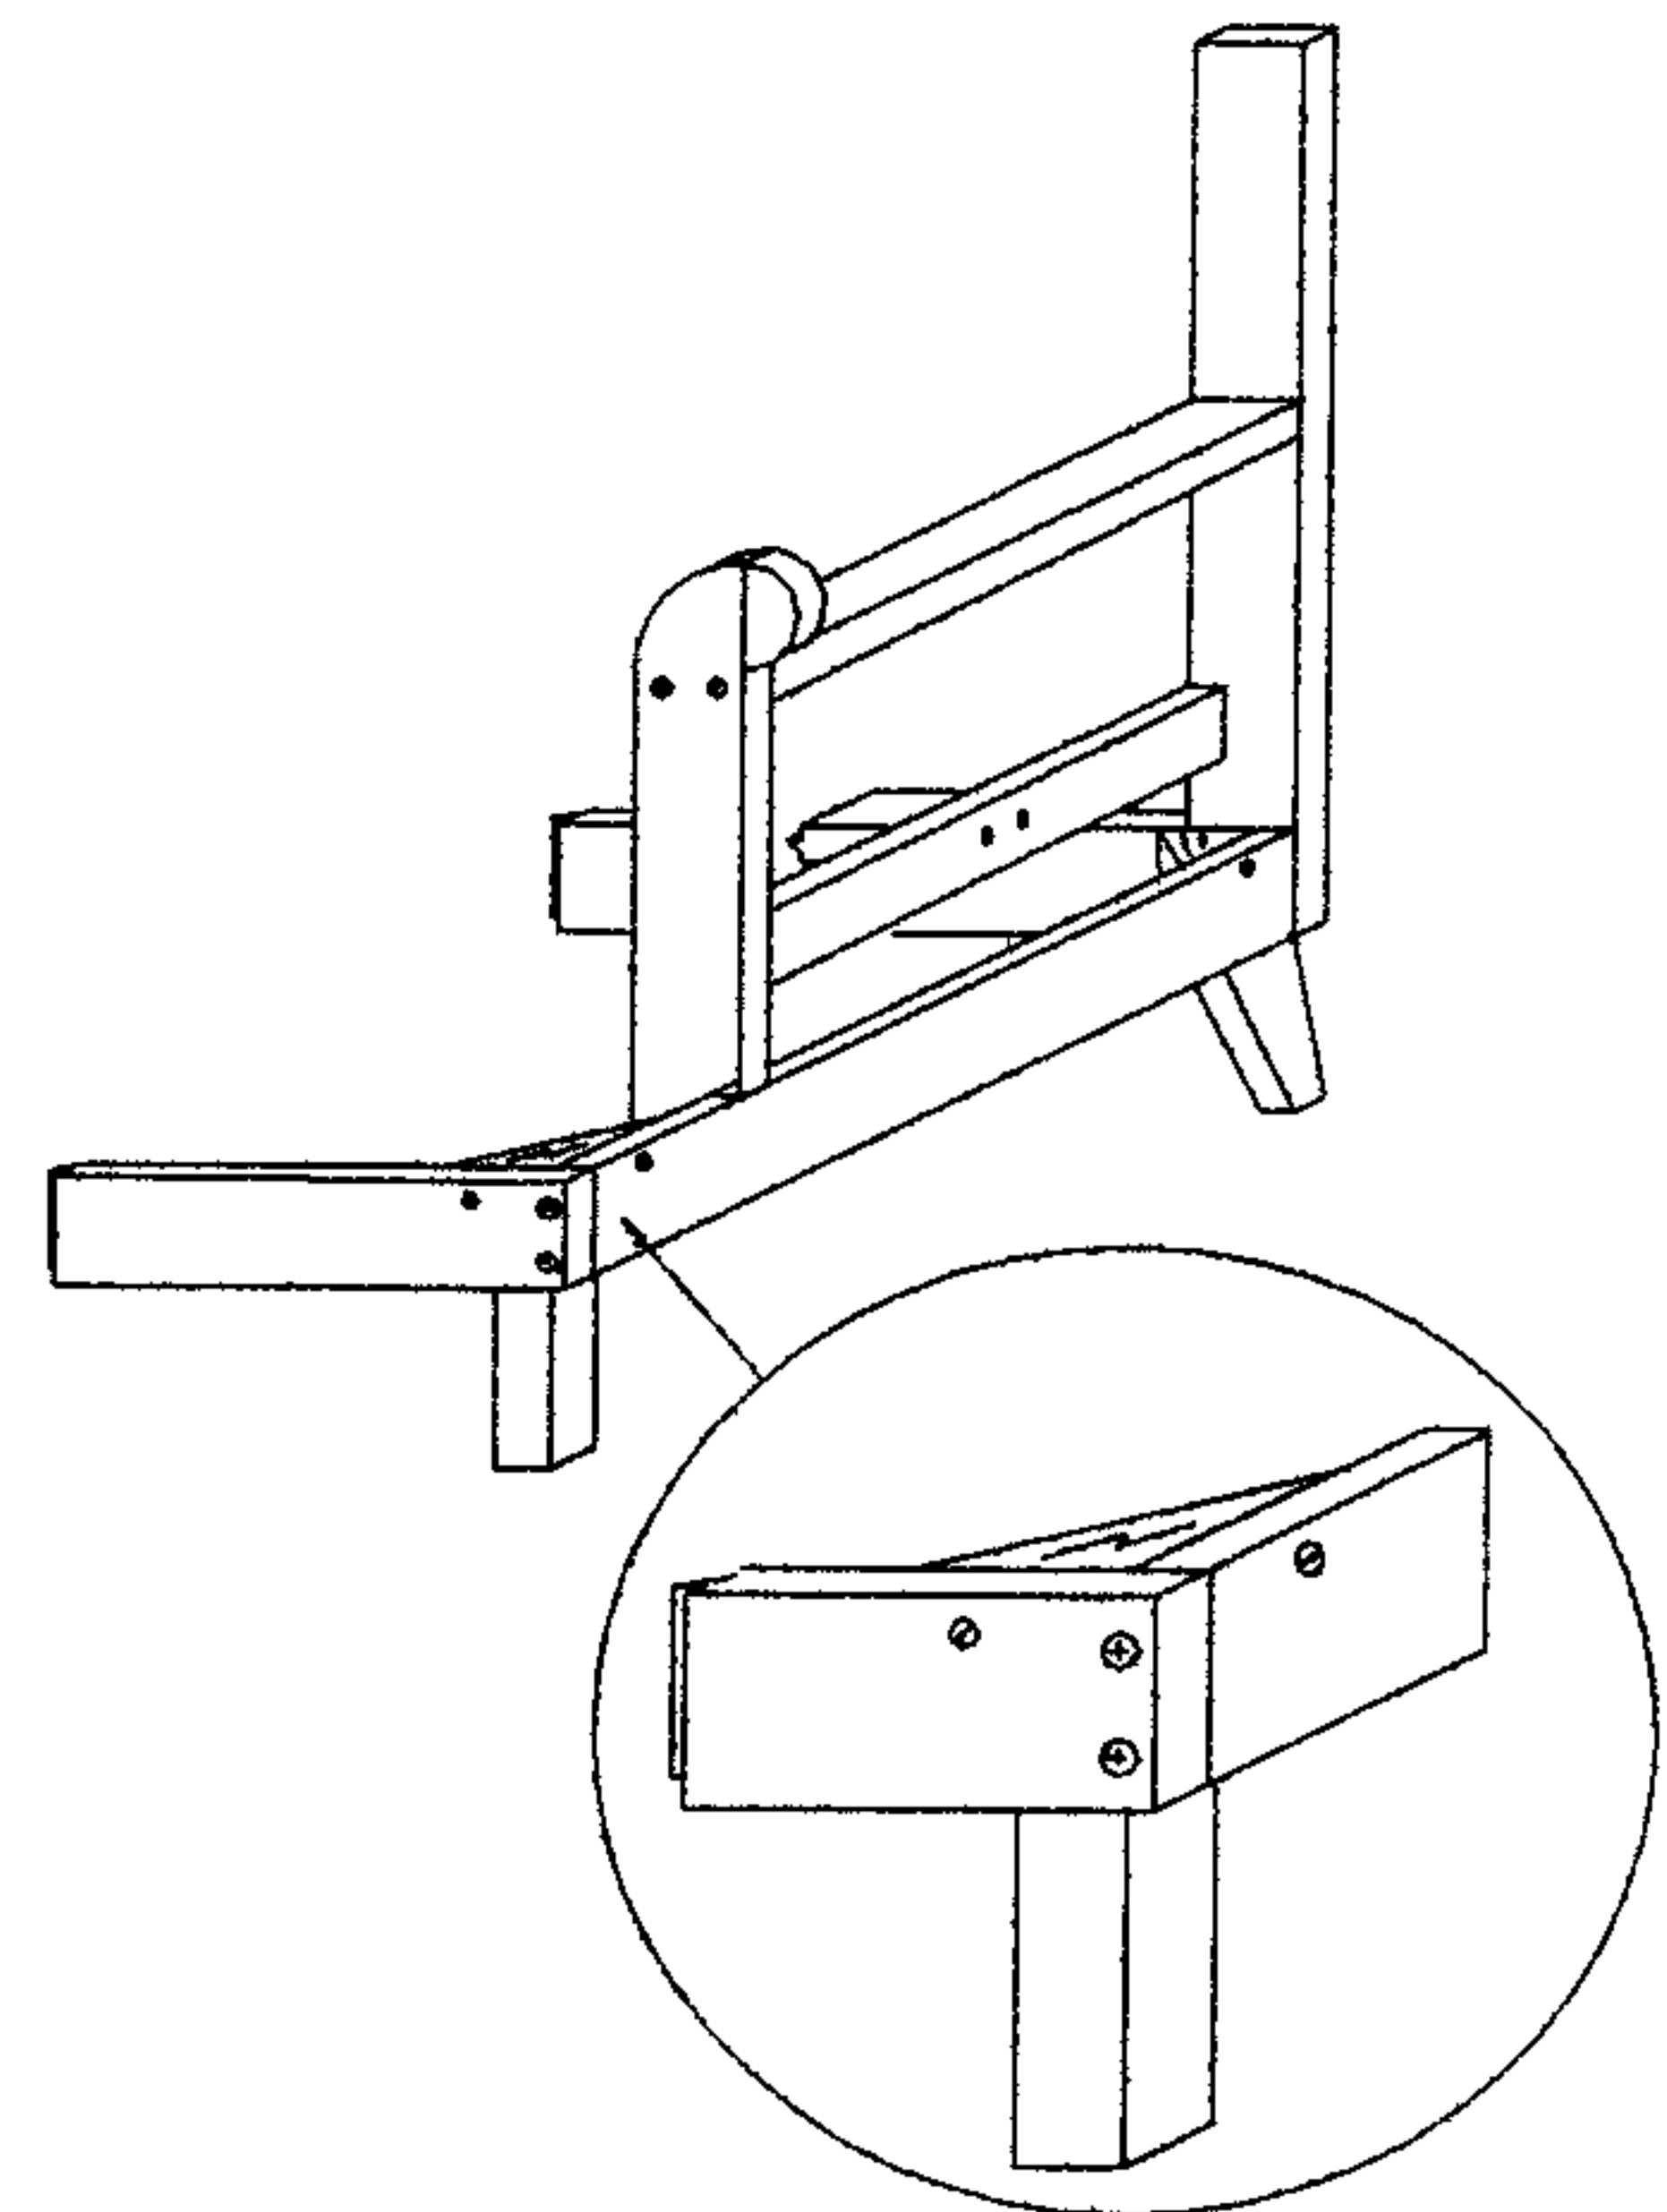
Reinforcement of side rail to front rail connection with solid wood corner block and screws. Note that screws are driven through the rails into the corner block.
